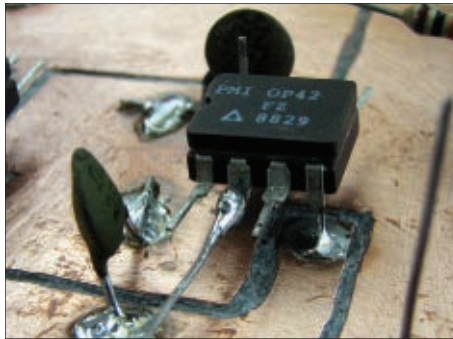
E. Completed connection with a solder joint, leaving lateral clearance to adjacent chip pins.
